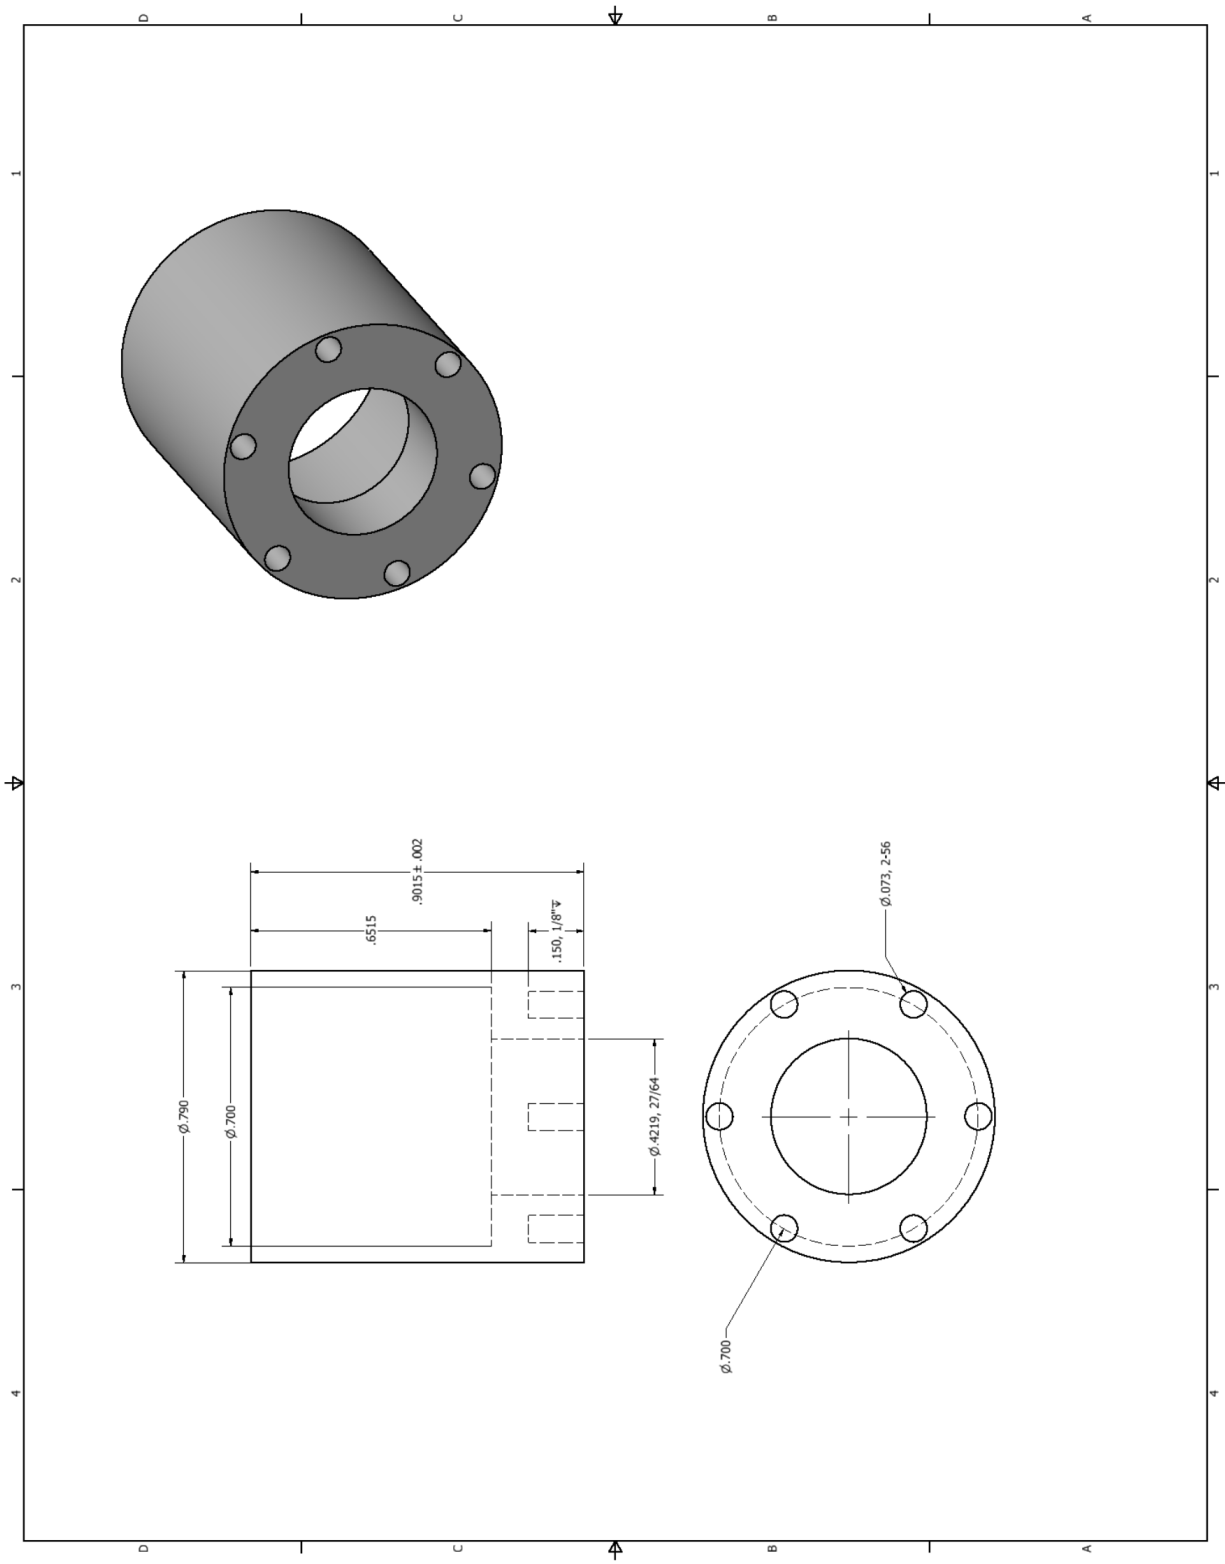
Engineering drawing: Valve extension. To be welded into the initial valve end (figure B.4)
